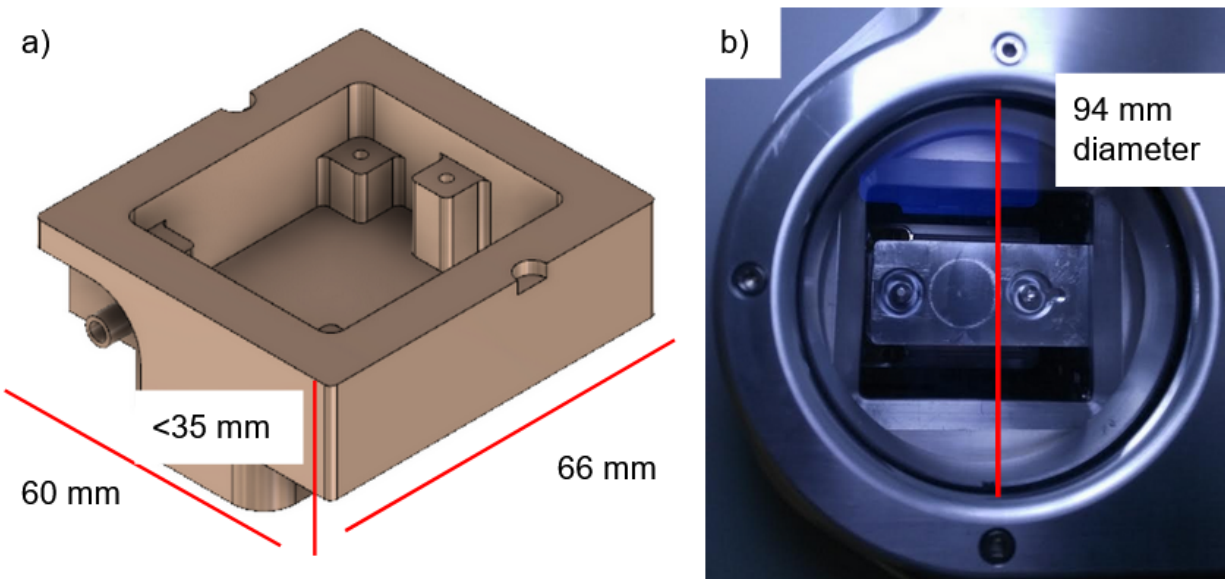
a) The dimensions of the solution base should be the same as for the commercial TF VTM base depicted here ( $W \times L = 66 \text{ mm} \times 60 \text{ mm}$ ). b) Top view of the empty XPS loadlock with closed cover. The solution base needs to fit into the closed loadlock of  $\text{Ø}94 \text{ mm}$ .
